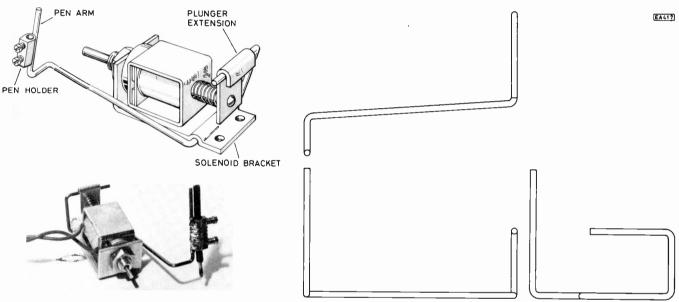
Solenoid mounting bracket and pen arm. Note the pen arm drawing is full size and can be used as a template for cutting and bending the arm
